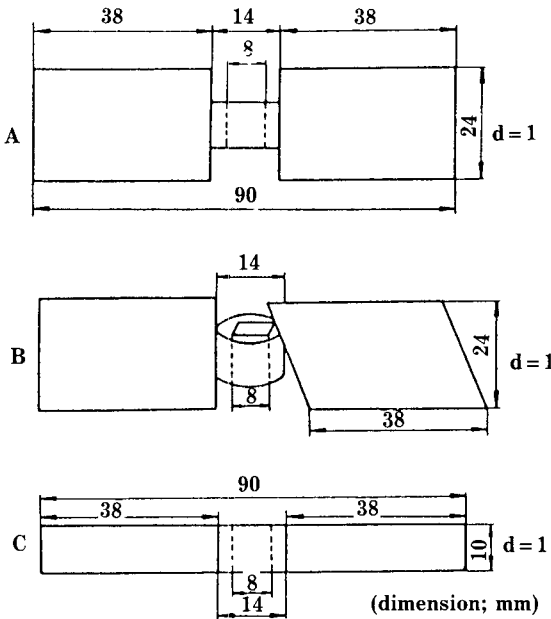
Shape and dimension of impellers; standard (A), 45°-angle (B), sharp (C).
